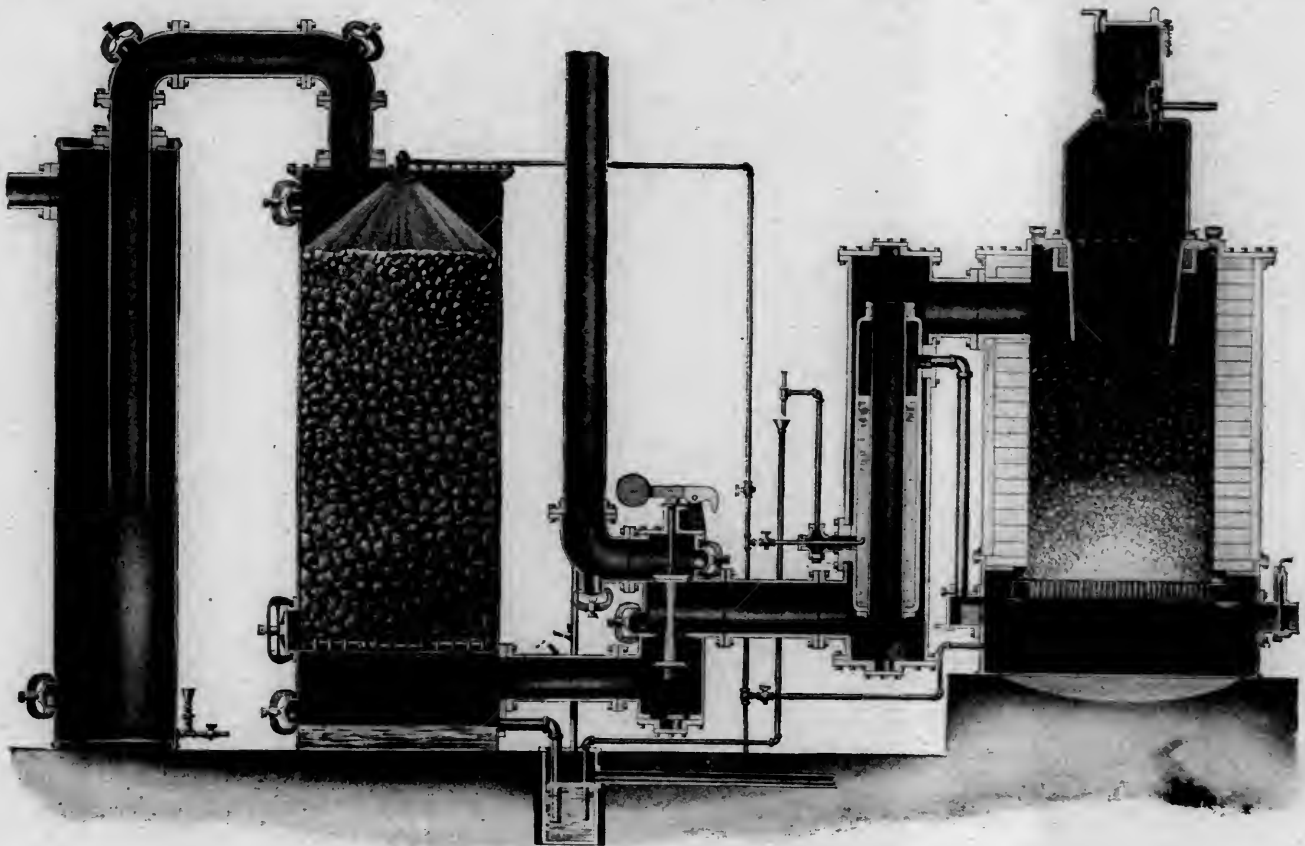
SECTIONAL VIEW OF FAIRBANKS-MORSE SUCTION GAS PRODUCER.
